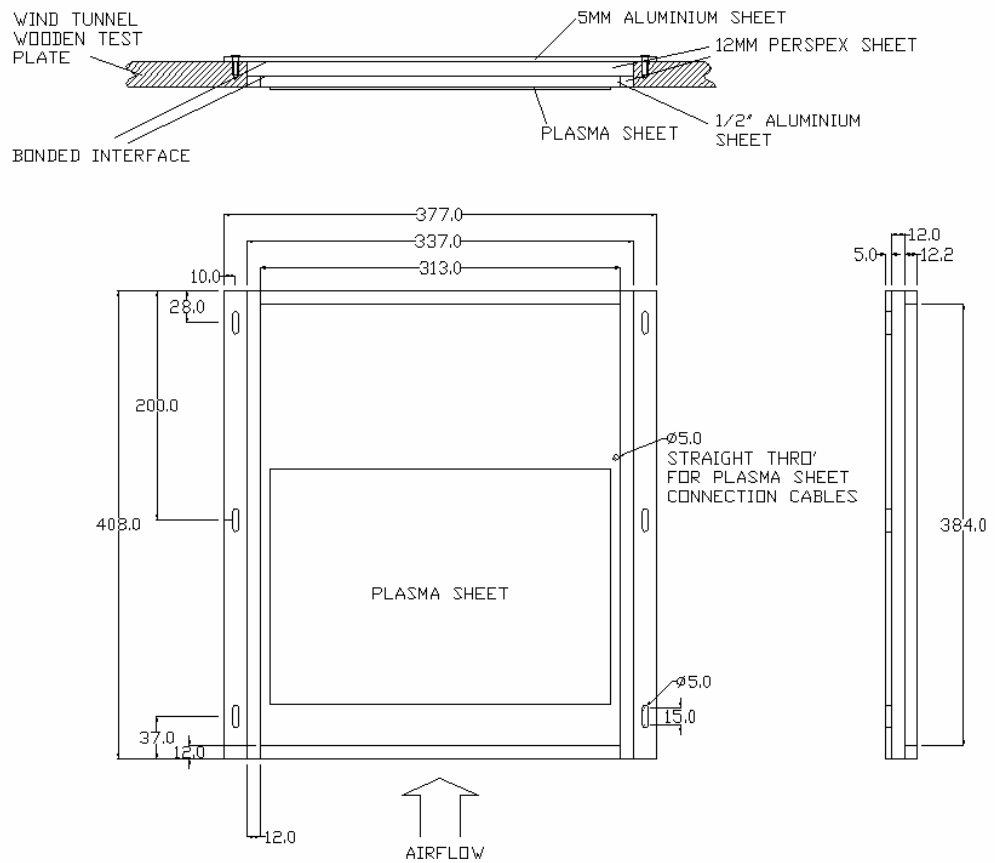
Detail of test plate. Plasma electrode sheets were bonded to the aluminium surface of the test plate to aid heat transfer away from the sheet. The test plate was flush mounted into the boundary layer plate (Fig 3.2.2), 1.9m from the leading edge.
